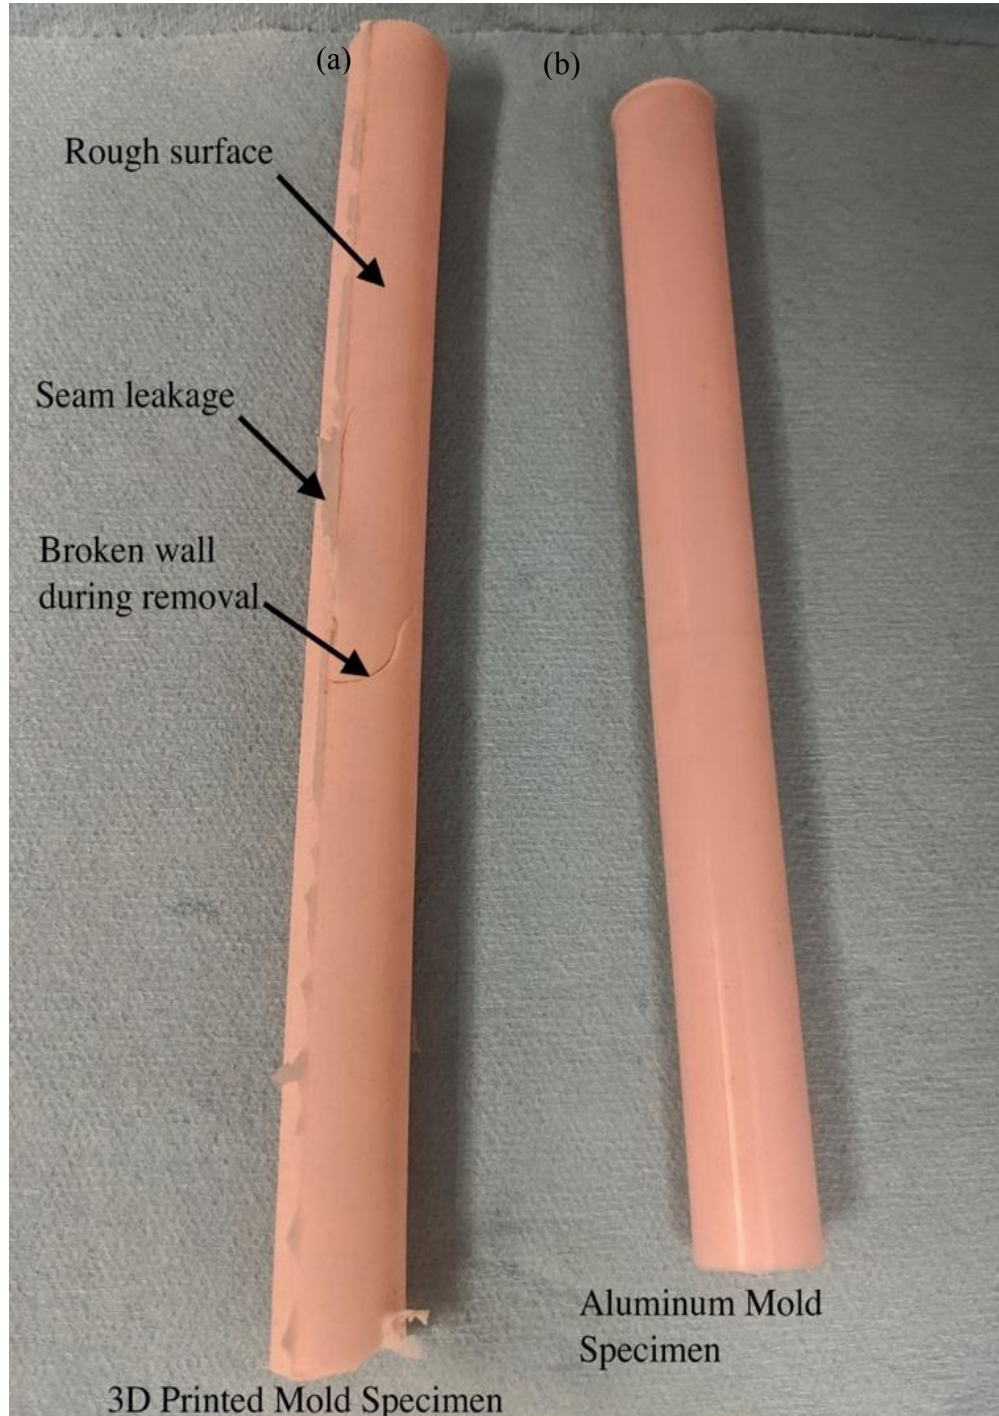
Resulting tube specimen from (a) 3D printed mold (b) aluminum mold
